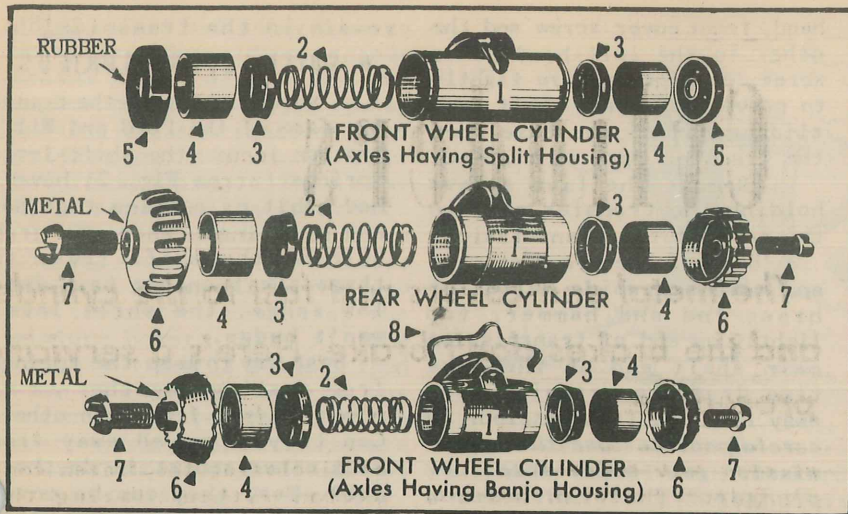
The front wheel cylinders of $\frac{1}{4}$ -ton GMC's with split-type axle housings, have rubber end-covers. All the rear wheels and the front wheels with banjo housings have metal end-covers subject to rusting.
